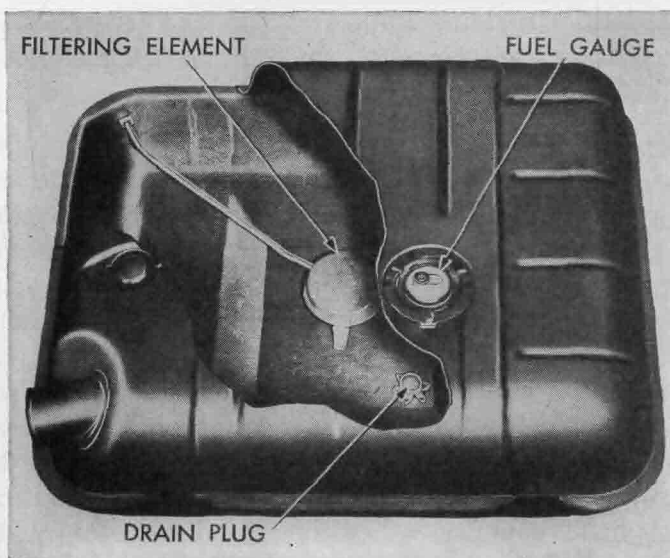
Fuel tank, partly cut away to show filtering element and drain plug. (Plymouth Division of Chrysler Corporation)
